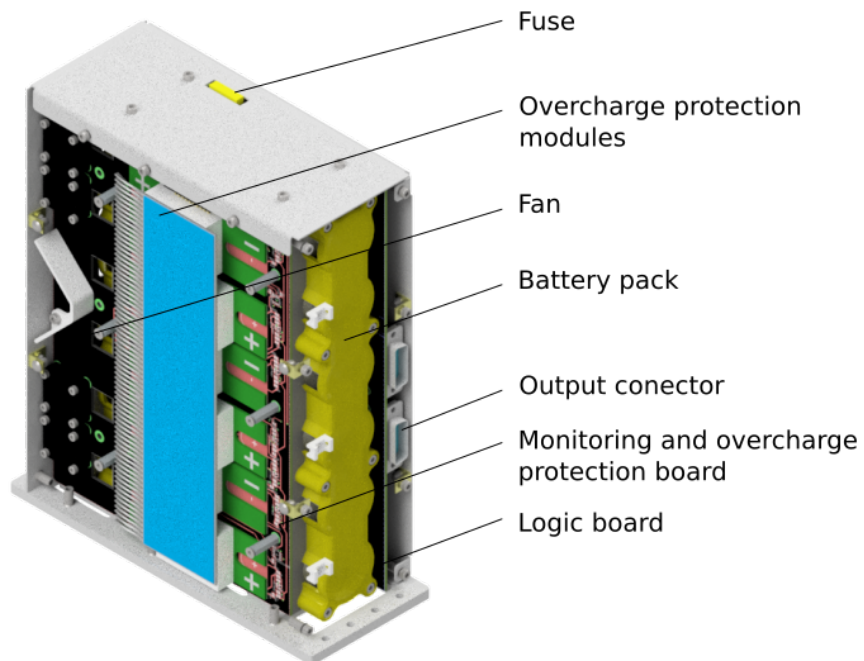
CAD drawing of the six cell extra battery, the casing is partially not shown.
